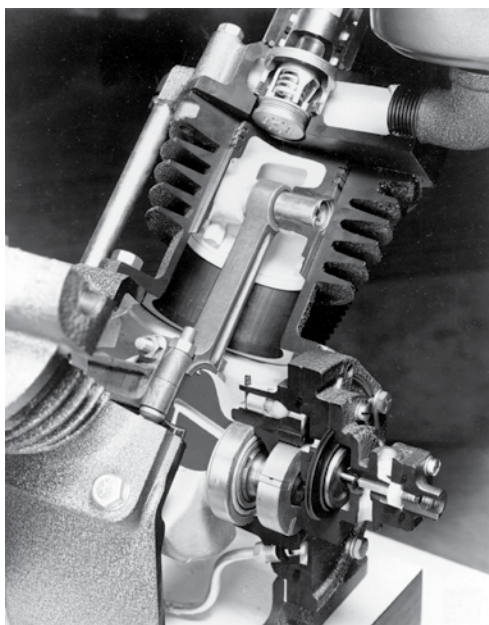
A full pressure lubricating system in a two-stage, air cooled, reciprocating air compressor.
